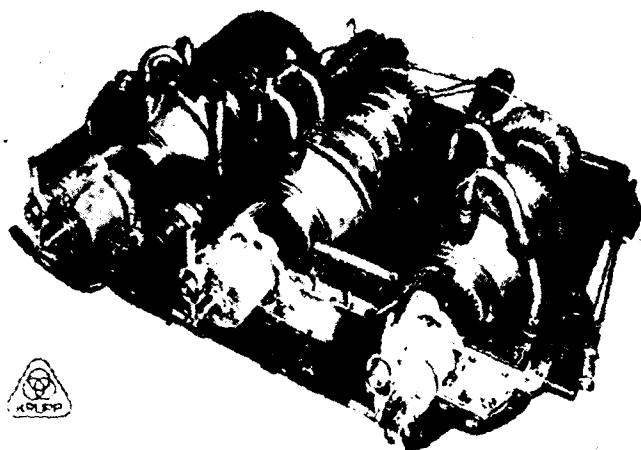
KRUPP hydraulic transmission for the 1220 HP Diesel locomotive, without casing, on the test bed.
